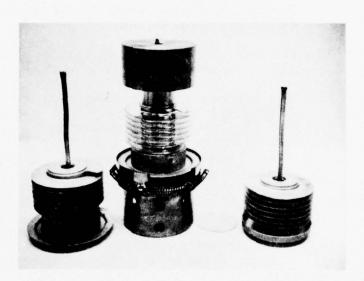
Soldering Fixture: The fixture shown positions the cathode heat-pipe with respect to the anode heat-pipe. The flanges on both heat-pipes are used as a reference. The inside diameter of the split ring which locates the two heat-pipes is machined slightly larger than the diameter of the silicon wafer. The spring wrapped around the split ring holds the fixture in place during soldering.
